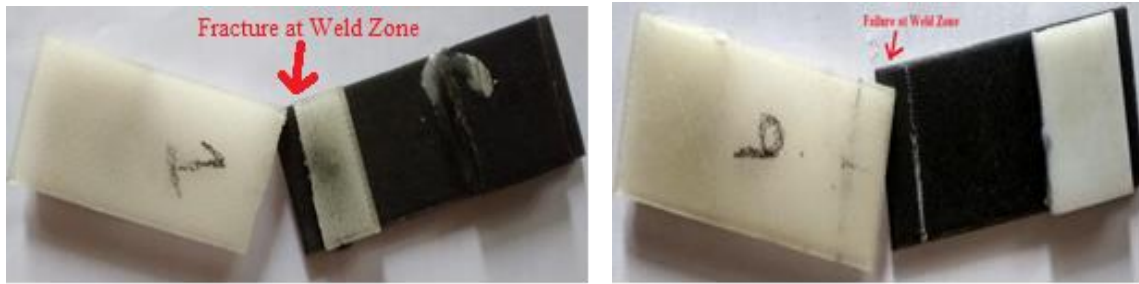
(Left) Photographic view of the sample-1 after pull test showing fracture at the edge of the weld zone (Right) Photographic view of the sample (sample number 9) after pull test showing failure at weld zone
